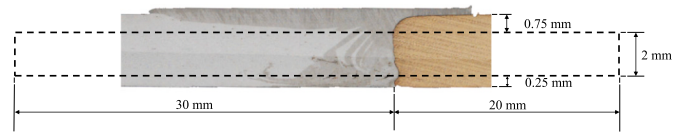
Dimensions of resistance measurement test specimen with reference to weld cross-section showing the 3 mm plate thickness was reduced to 2 mm.
